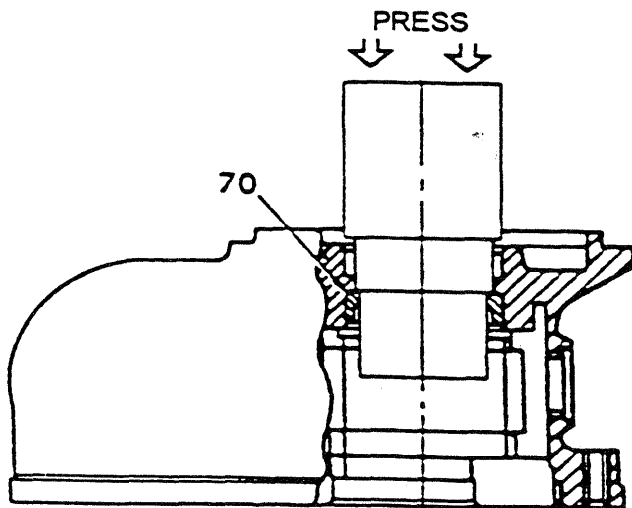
Pressing Bearing (70) Outer Race Out of Housing
